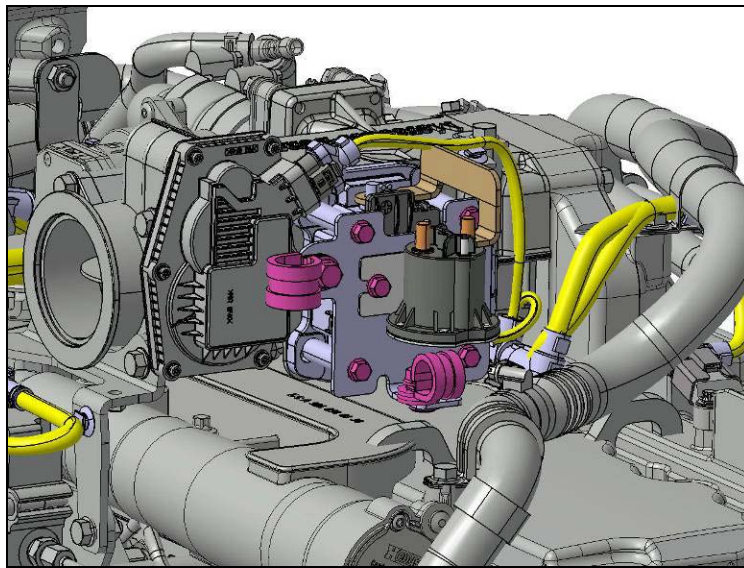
Relay and Bracket Assembled to Engine (EPA07 shown)
